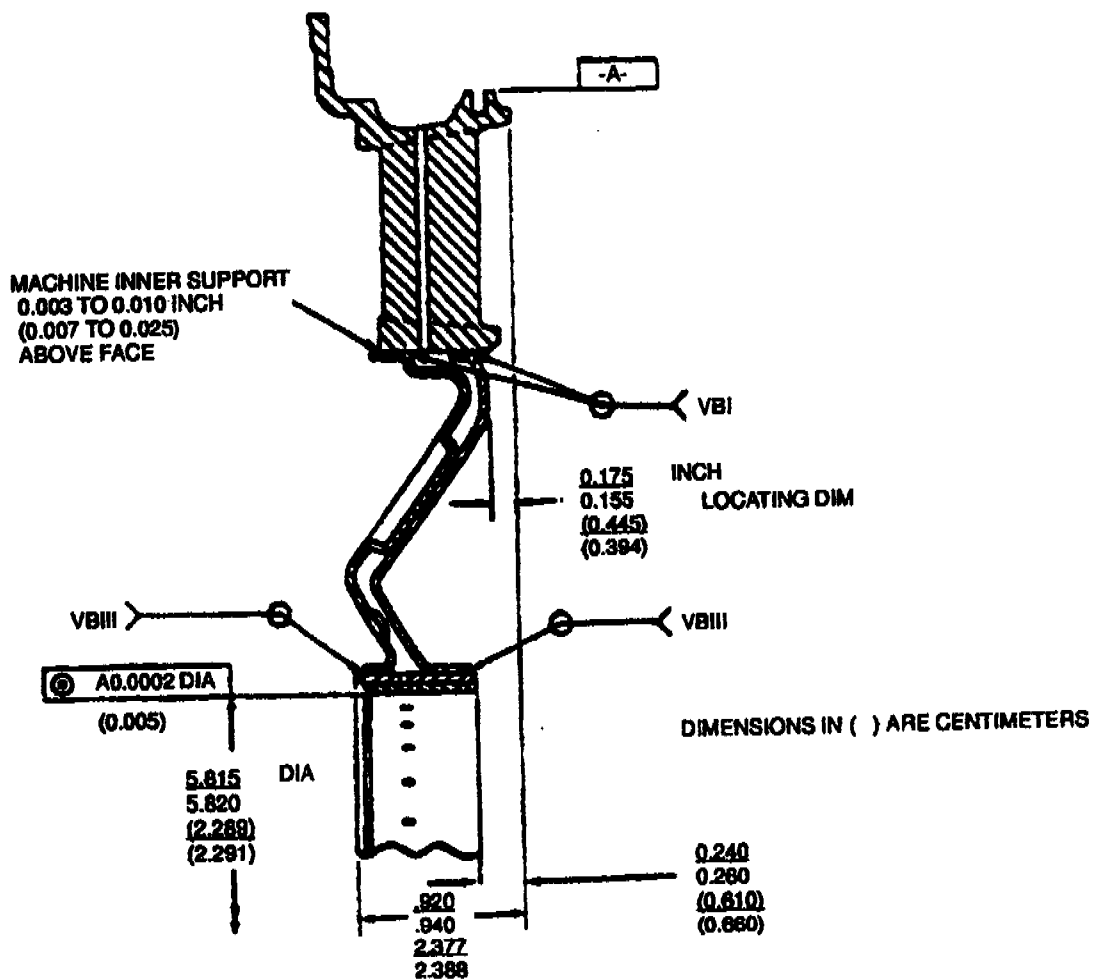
Brazing and Final Machining of Second Stage Gas Producer Nozzle Assembly.
